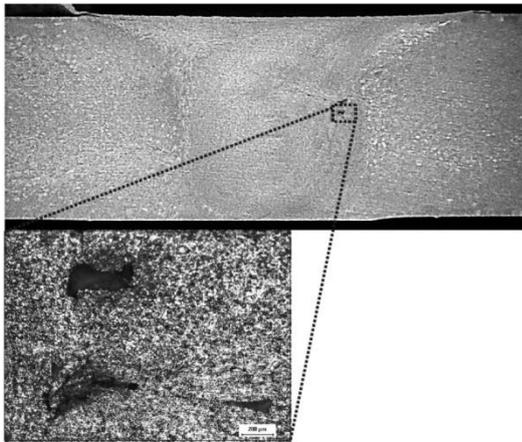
Friction Stir Welding with Running Void in AA6061-T6(S.Kahl, 2010)
